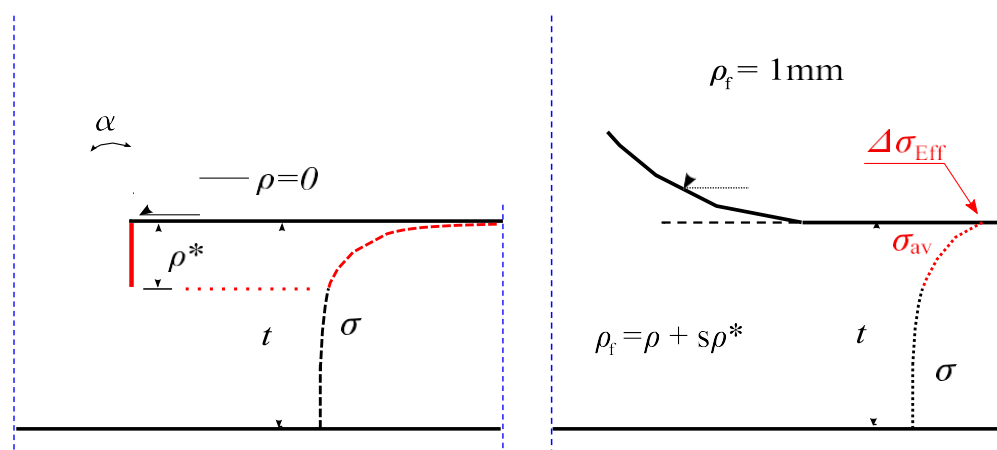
Neuber's welded joint micro-support concept [21].
